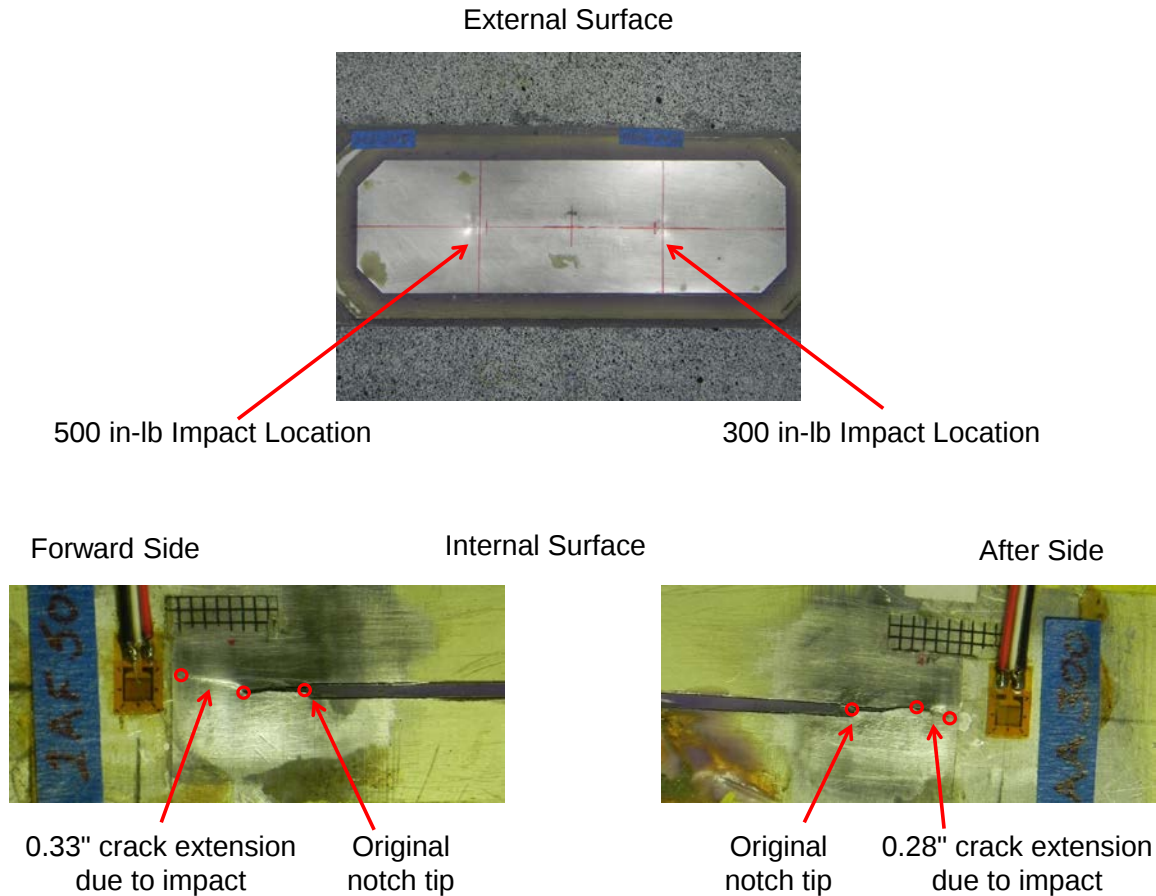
Locations of impact damage and crack extension for the U-A2 repair after impact
